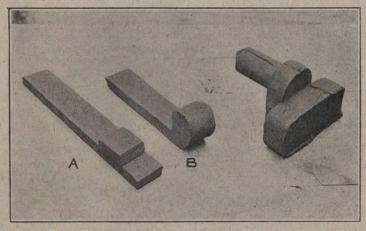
Hinge and Link Block Produced on the Forging Machine.
